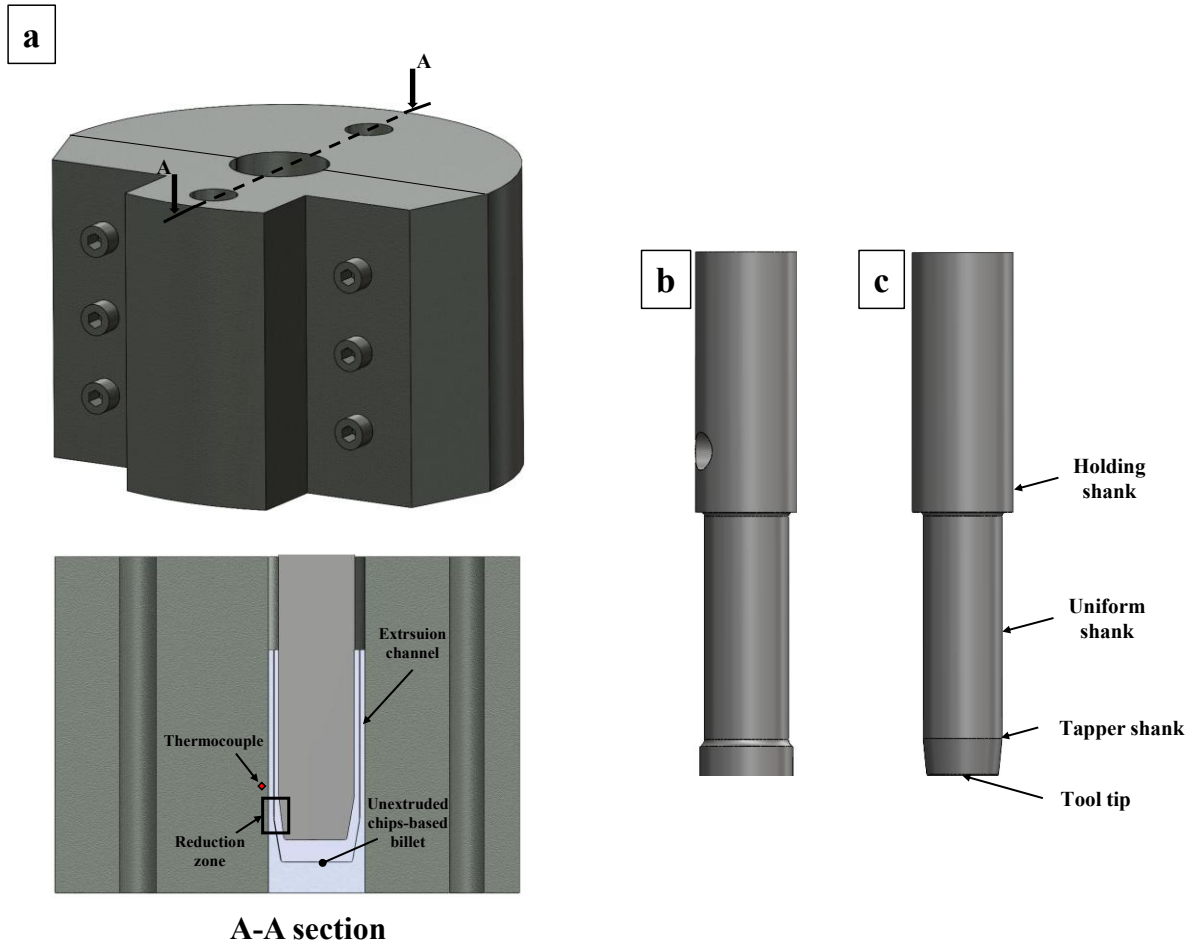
Sketches of the (a) designed die with section, (b) compacting tool, and (c) 20° tapered tool.
